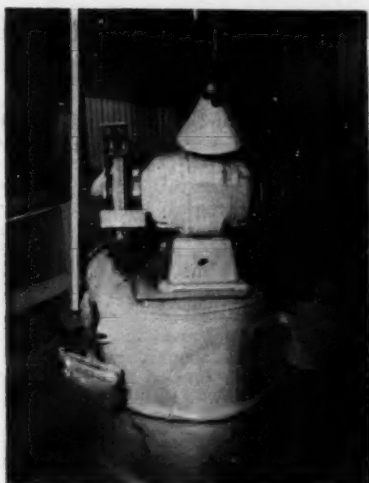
Mounting for electric grinder. It is believed that a sturdy mounting will lengthen the life of any power machinery. Therefore, the mounting shown in this picture is suggested as being a very satisfactory arrangement for an electric grinder.
